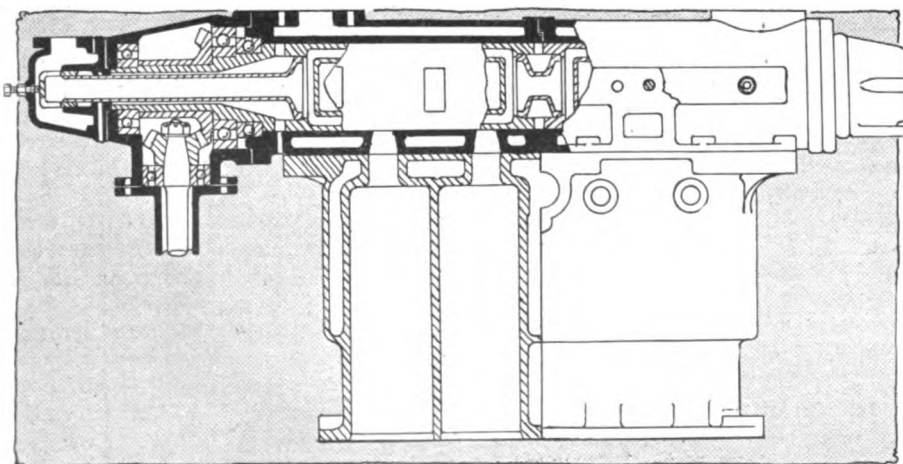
Sectional view of Castiglione and Bolton rotary-valve motor
